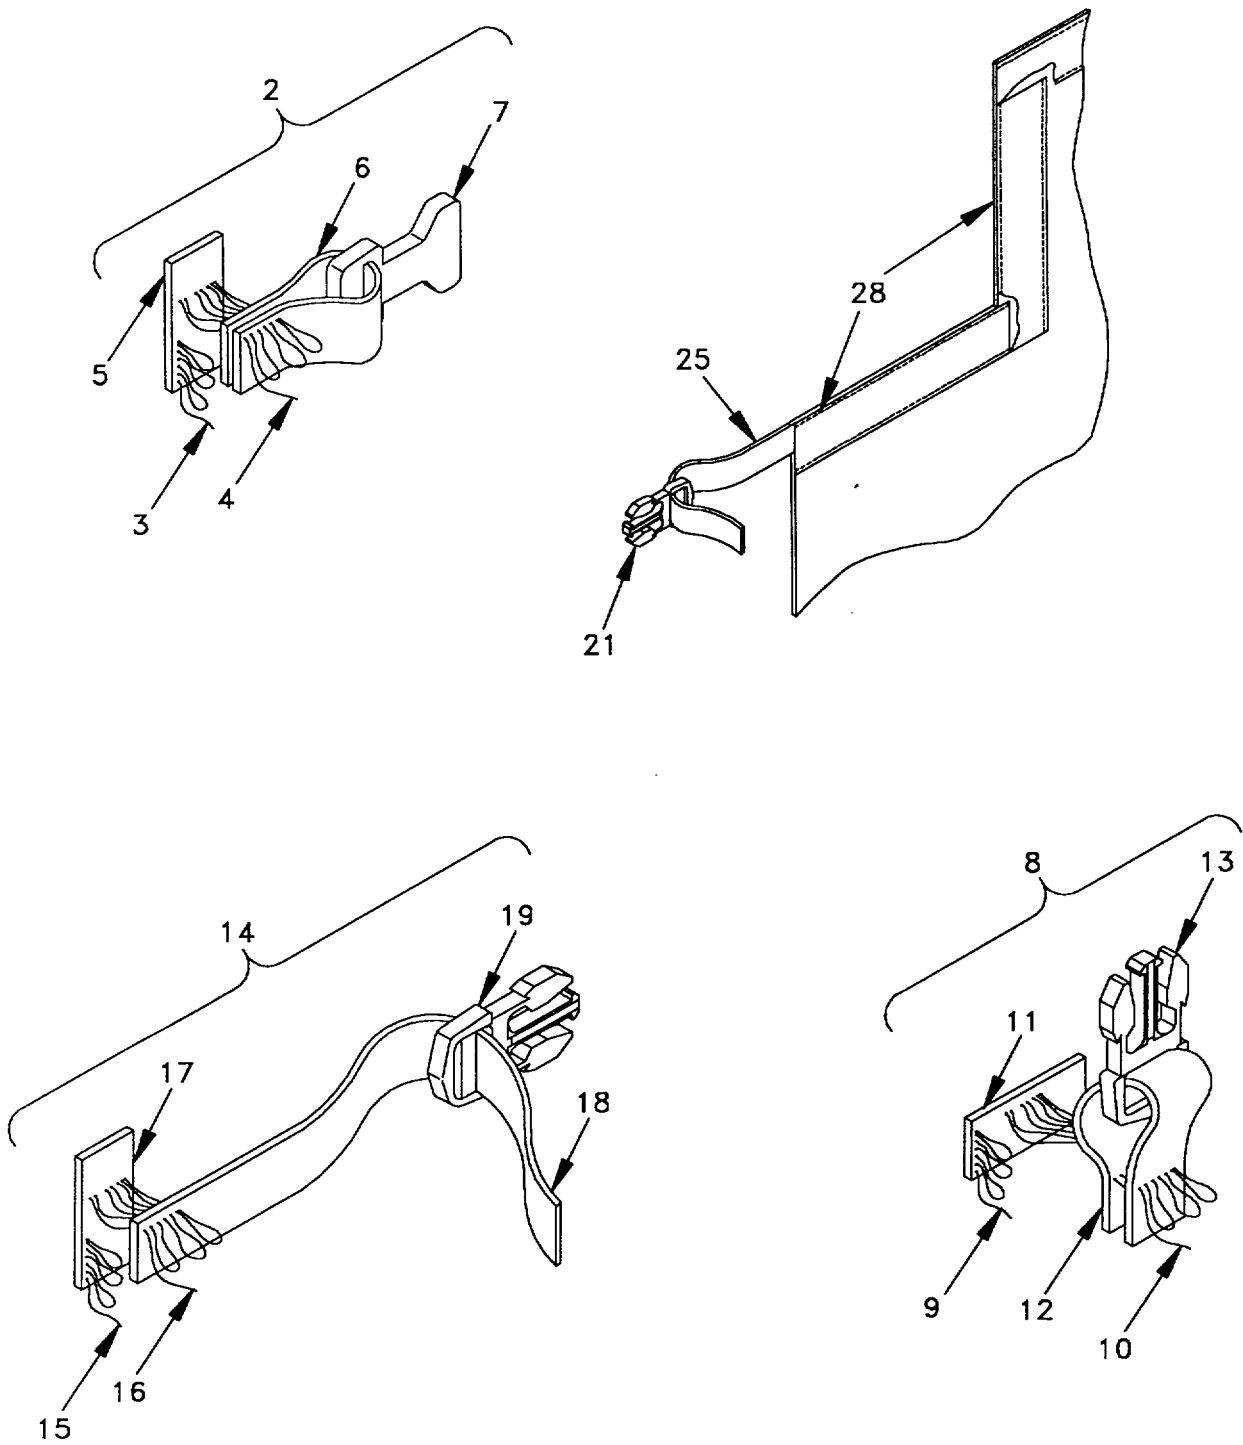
Plain Wall Assembly (Sheet 2 of 2)
